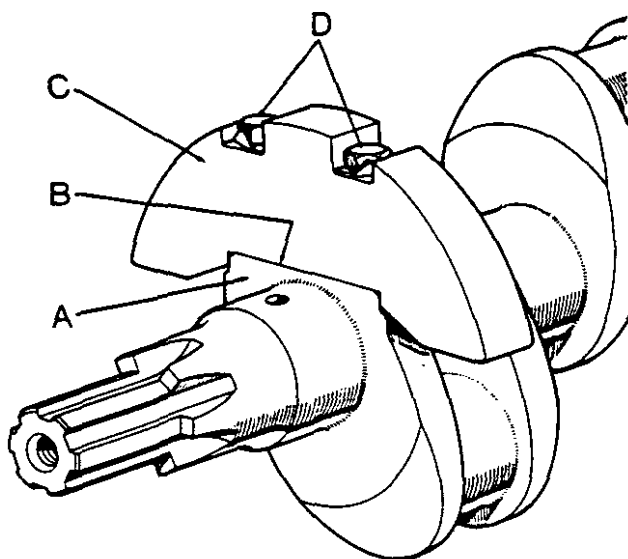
CHECKING BALANCE WEIGHTS AFTER INSTALLING
